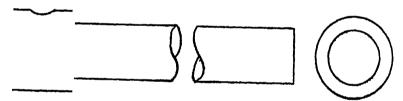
ARBOR WITH A DRIVER FOR FINISHING BUSHINGS
